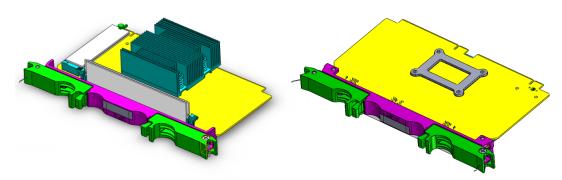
Card Retention Mechanism Mounted on 1S Server Card
